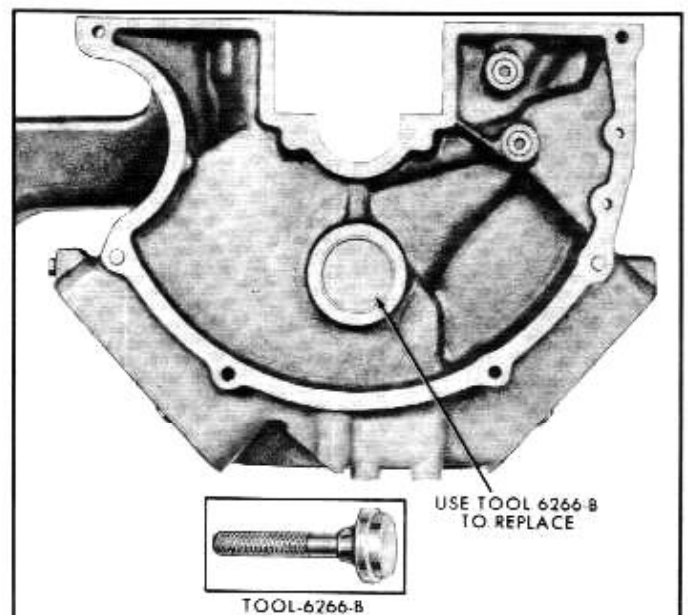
A-71—Tool for Installation of Camshaft Bearing Plug
